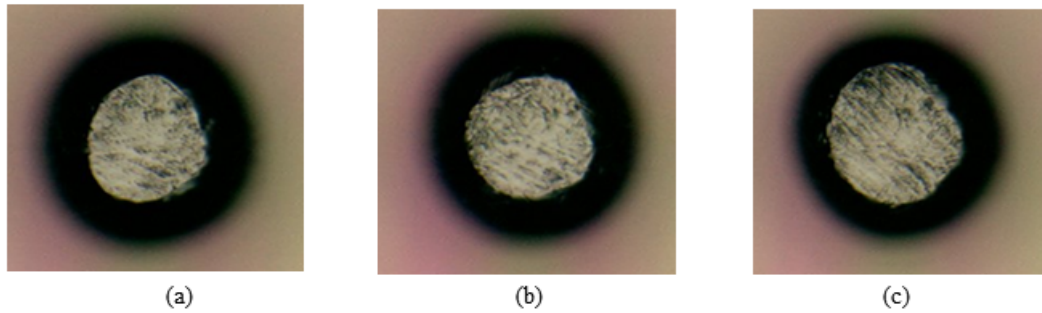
Probe mark top view in solder bump on overdrive (OD) are (a) 75 μm ; (b) 100 μm ; (c) 125 μm .
